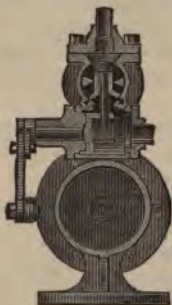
CROSS SECTION, DAVIDSON STEAM CYLINDER AND VALVE.
